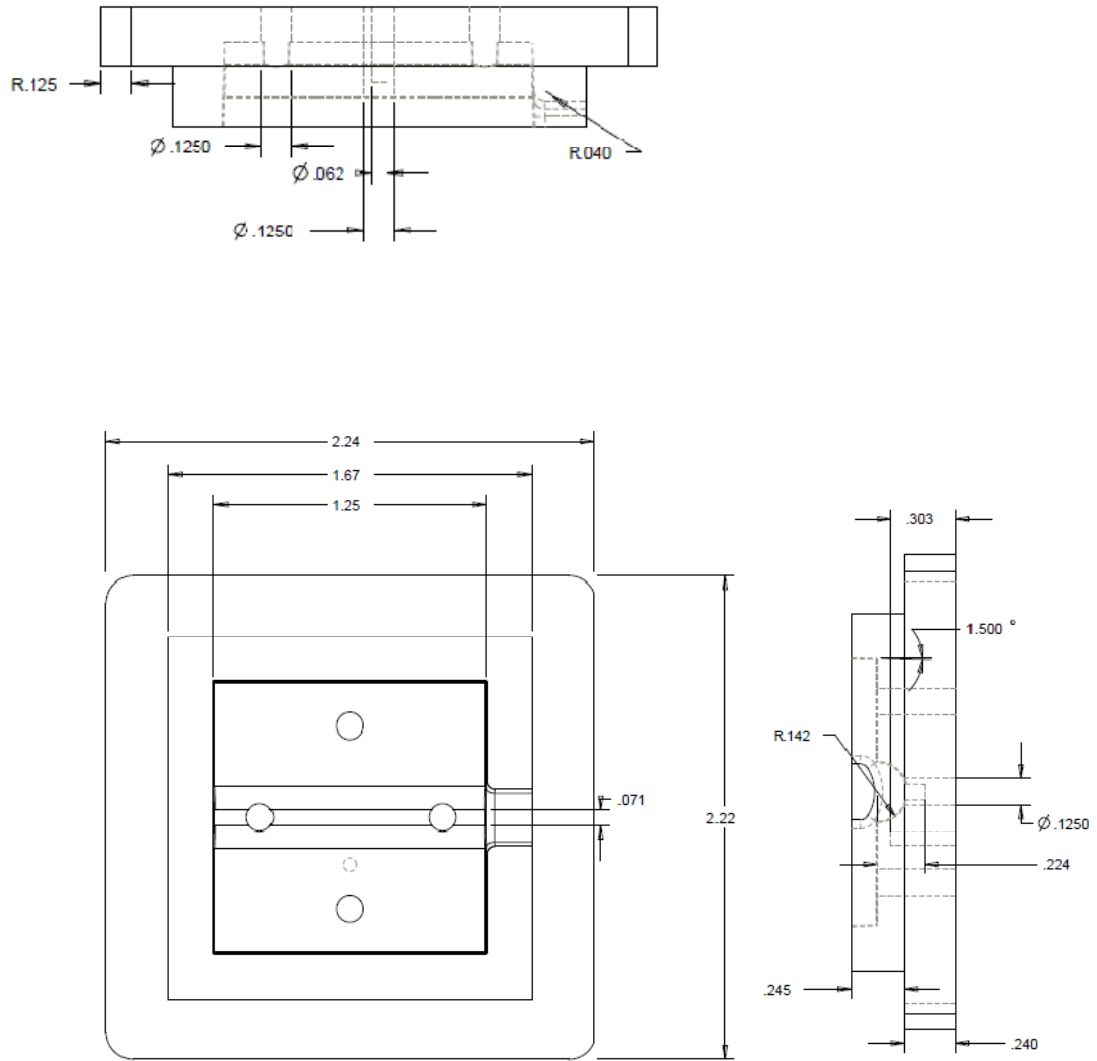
4: Drawing of Cavity Insert with Dimensions in Inches
